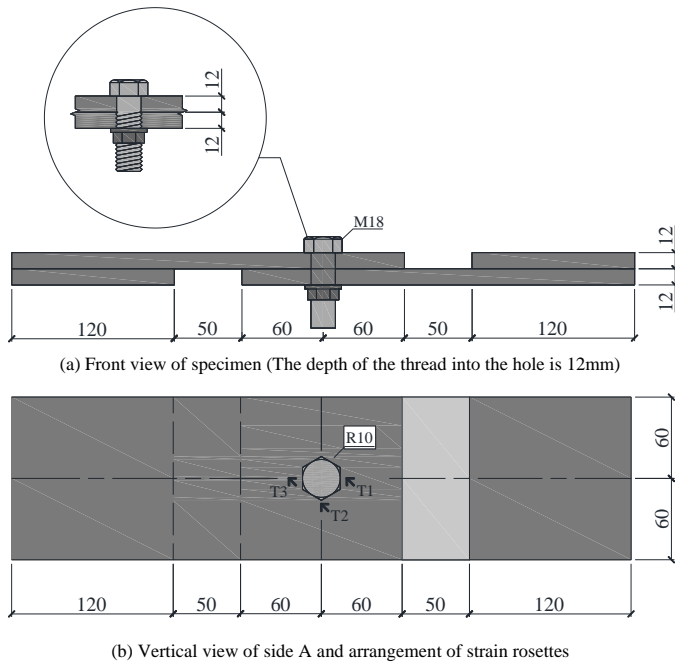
Schematic diagram of specimen geometry (all dimensions are mm).
